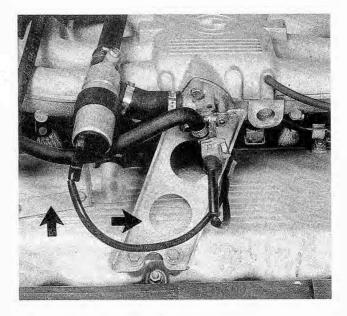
Intake manifold and idle air stabilizer valve support brackets (arrows) on 325e engine. Brackets on other engines are similar.
